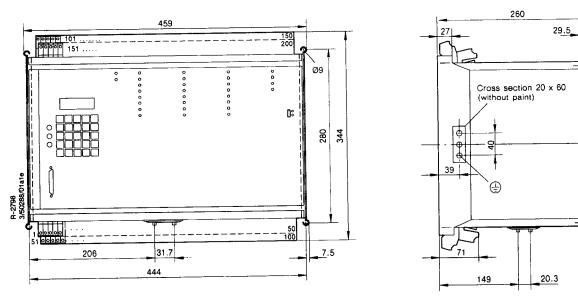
7SA513 with housing 7XP2050-2 (for panel flush mounting/cubicle mounting)
